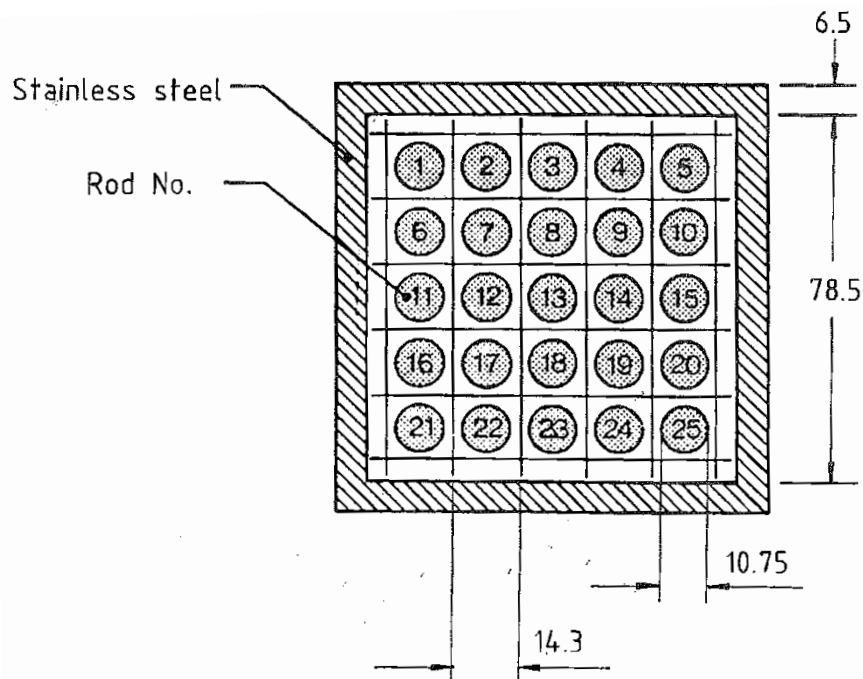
5 x5 rod bundle with housing – cross section [A.2]
